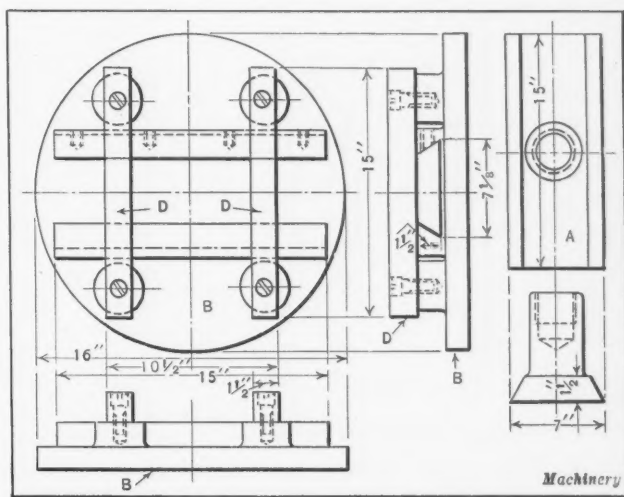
Faceplate and Driver of Attachment used for turning Ellipse
